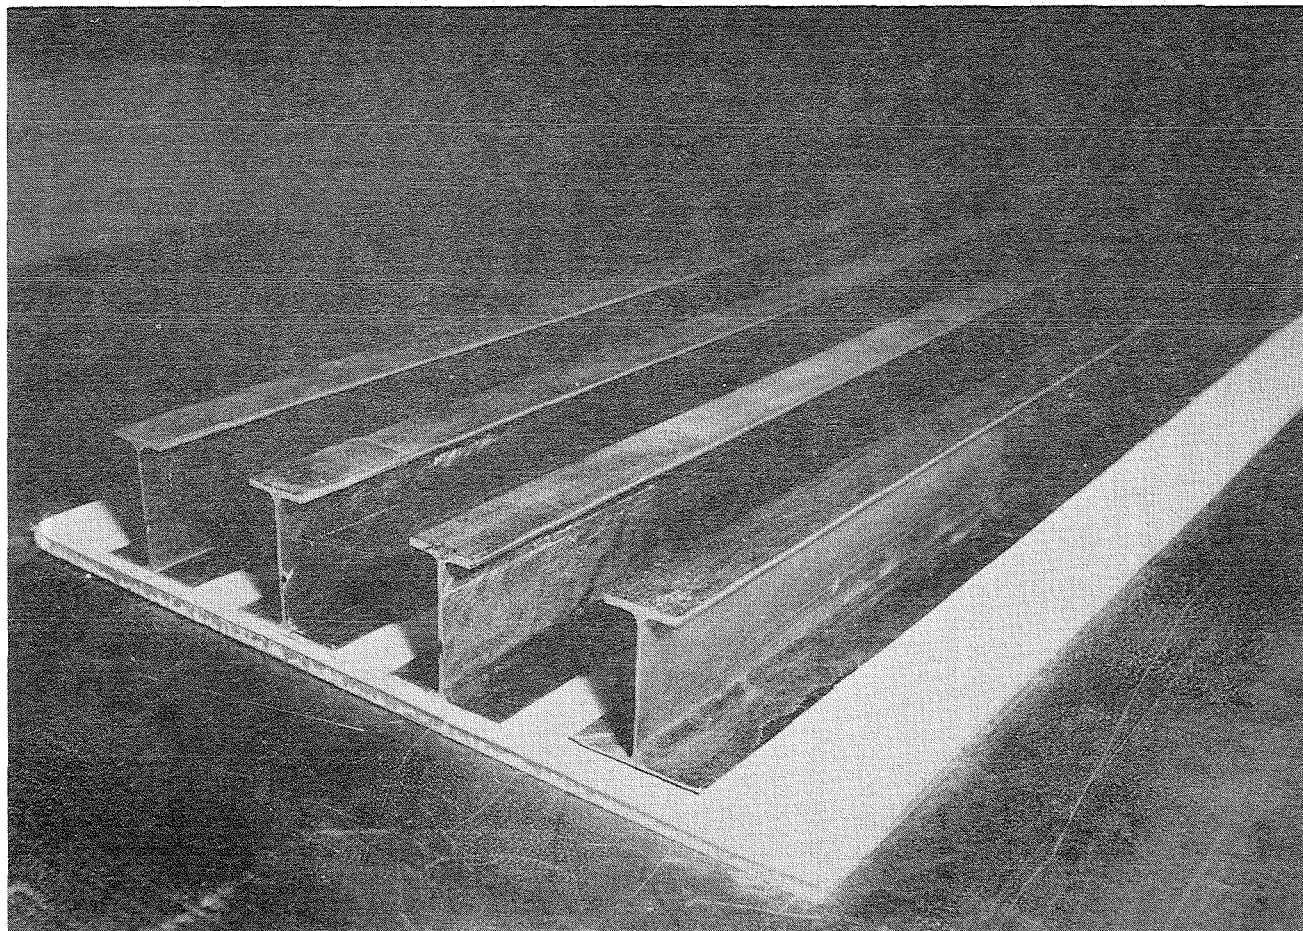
"I" Stringers in Dry Fit Position on Skin Assembly
